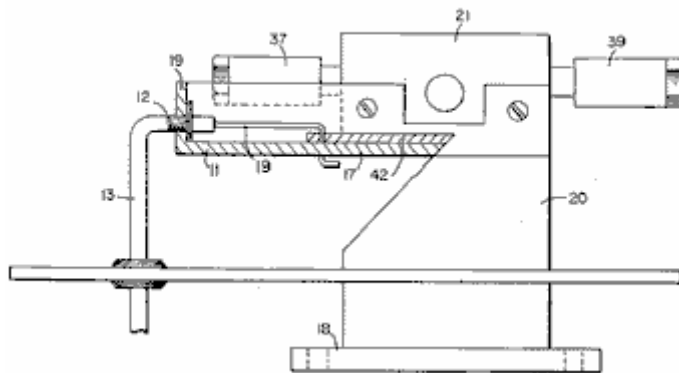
is a top view of the air intake valve to fuel mixing chamber.
